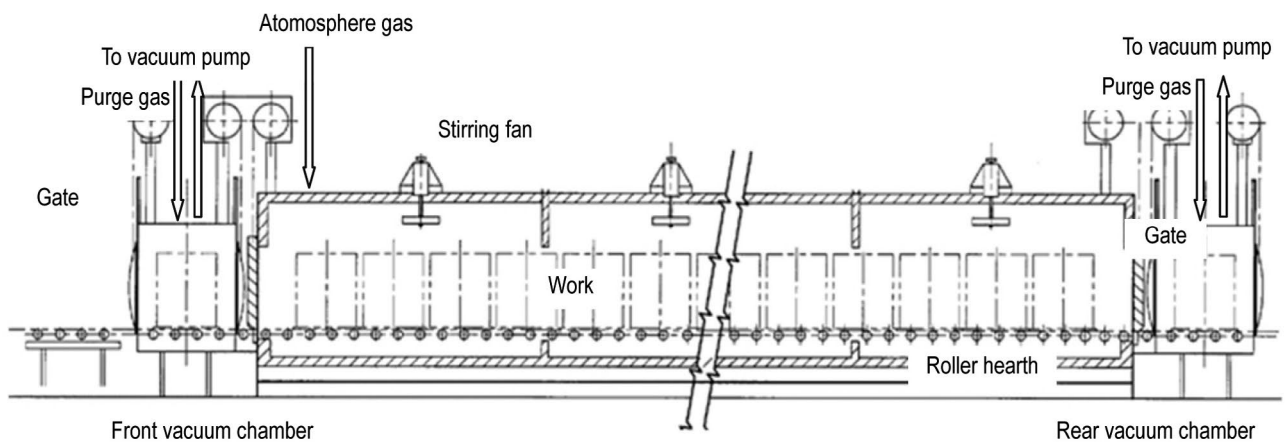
Outline of continuous heat treatment furnace with vacuum chamber.
